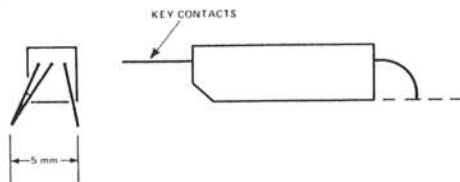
Shaping the key contacts. Each key should be firmly gripped at its sides when splicing the contacts, to avoid breaking the rivets. The leads should be level with the contact base. Before soldering, place the key contact on a flat surface to check that the leads are level. The key contacts can now be glued to the PCB with the same epoxy resin adhesive as before.
